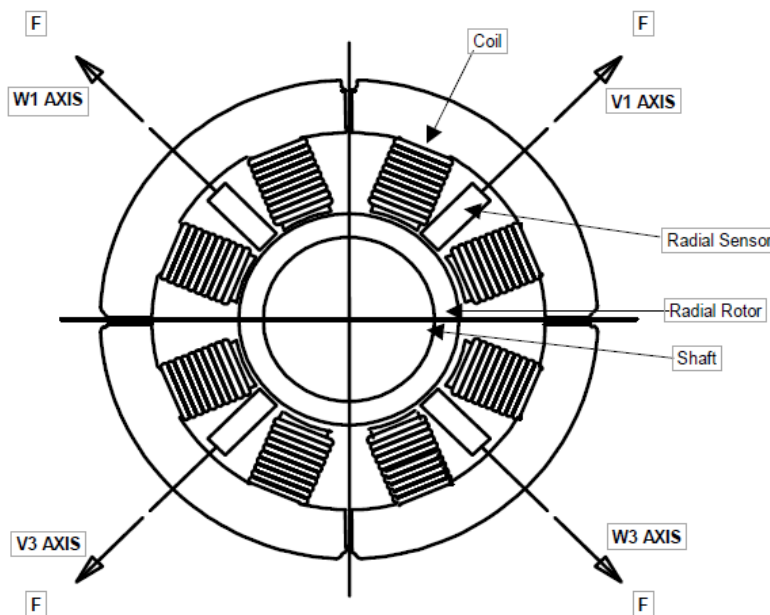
AMB sensor and electromagnet arrangement in SKF test stand (viewed from driver to driven) (SKF, 2014b)
